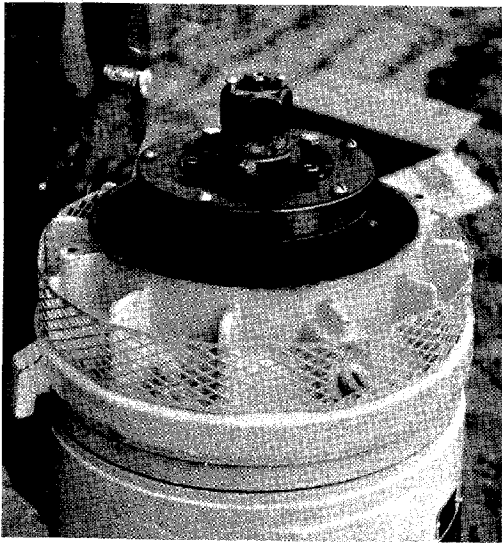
Impeller Adjustment Completed. Lock Screws Shown In Position But Not Yet Tightened.
